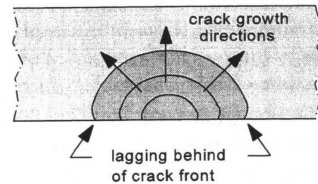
A surface crack in a plate showing that the crack at the surface lags behind [1].
